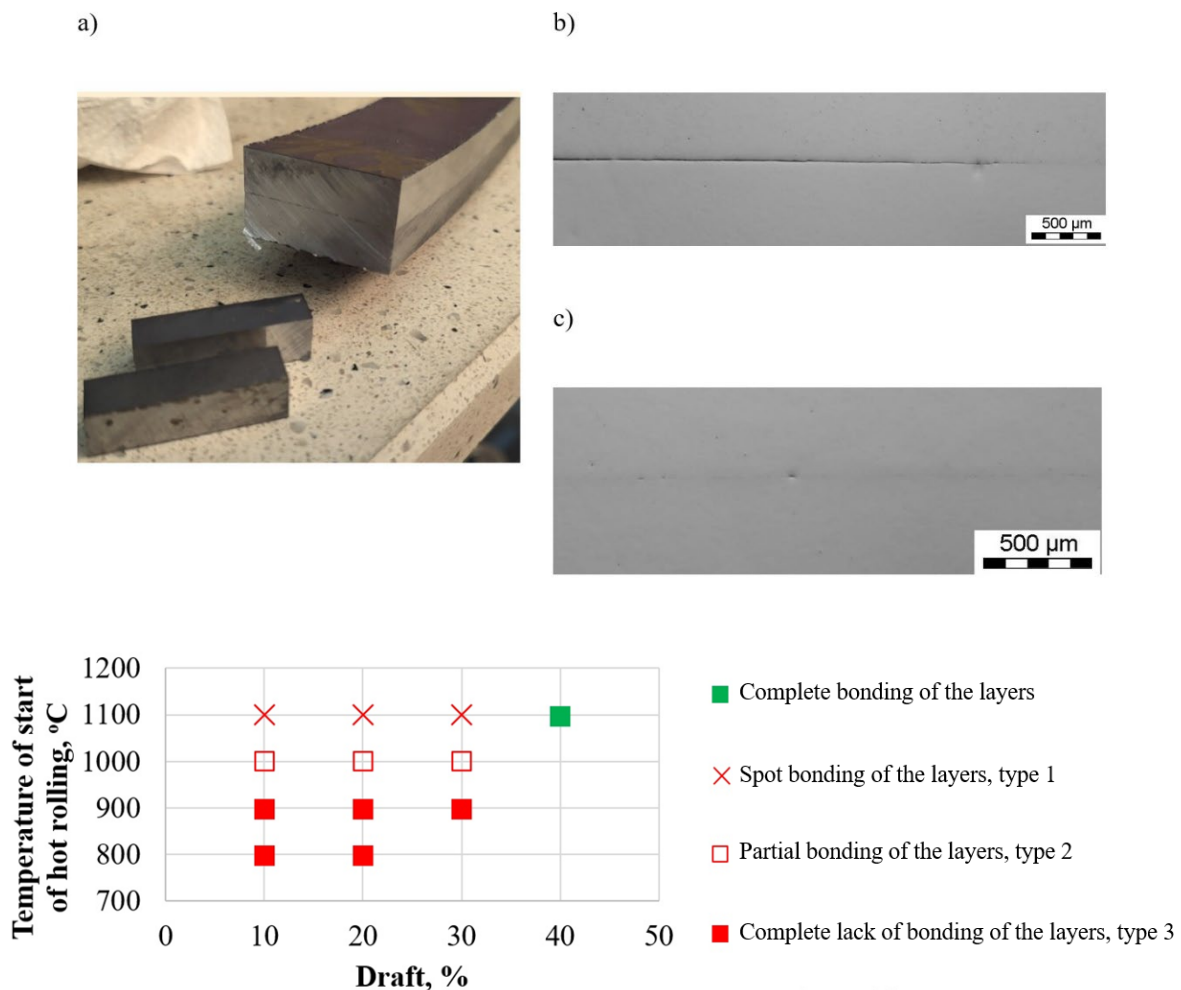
Photographs and classification of the type of defects occurring in the welding plane of S355J2/NANOS-BA® flat bars after hot rolling with variable process parameters: a) type 3, complete lack of bonding of the layers, type 1, spot lack of bonding, b) type 2, partial bonding of the layers, visible delamination at the edges of the strip and c) visible voids in the bonding plane
